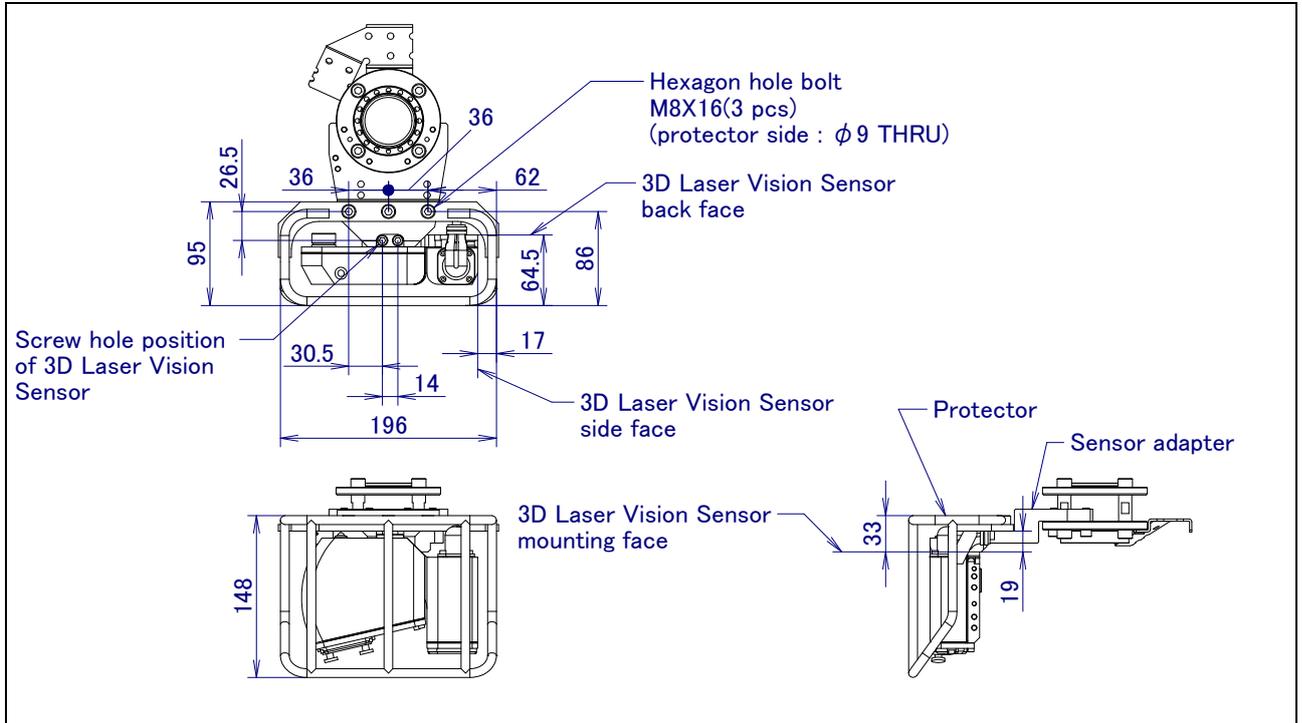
(a) External dimension of protector for 3D Laser Vision sensor (without LED light)
